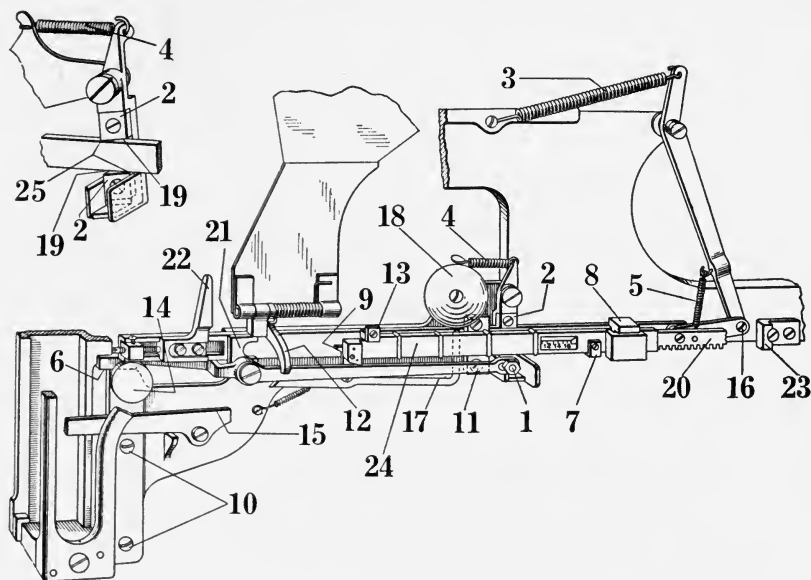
New Style Assembler Slide assembly. This slide is an improved pattern of the one shown in Fig. 27. Matrices, as they enter the assembling elevator, move the slide to the left by crowding against the finger 22. As each matrix settles down, the slide is permitted to move under stress of the spring 4 holding the two fibre brake blocks 2 and 2 against the slide (shown in the detail drawing).
